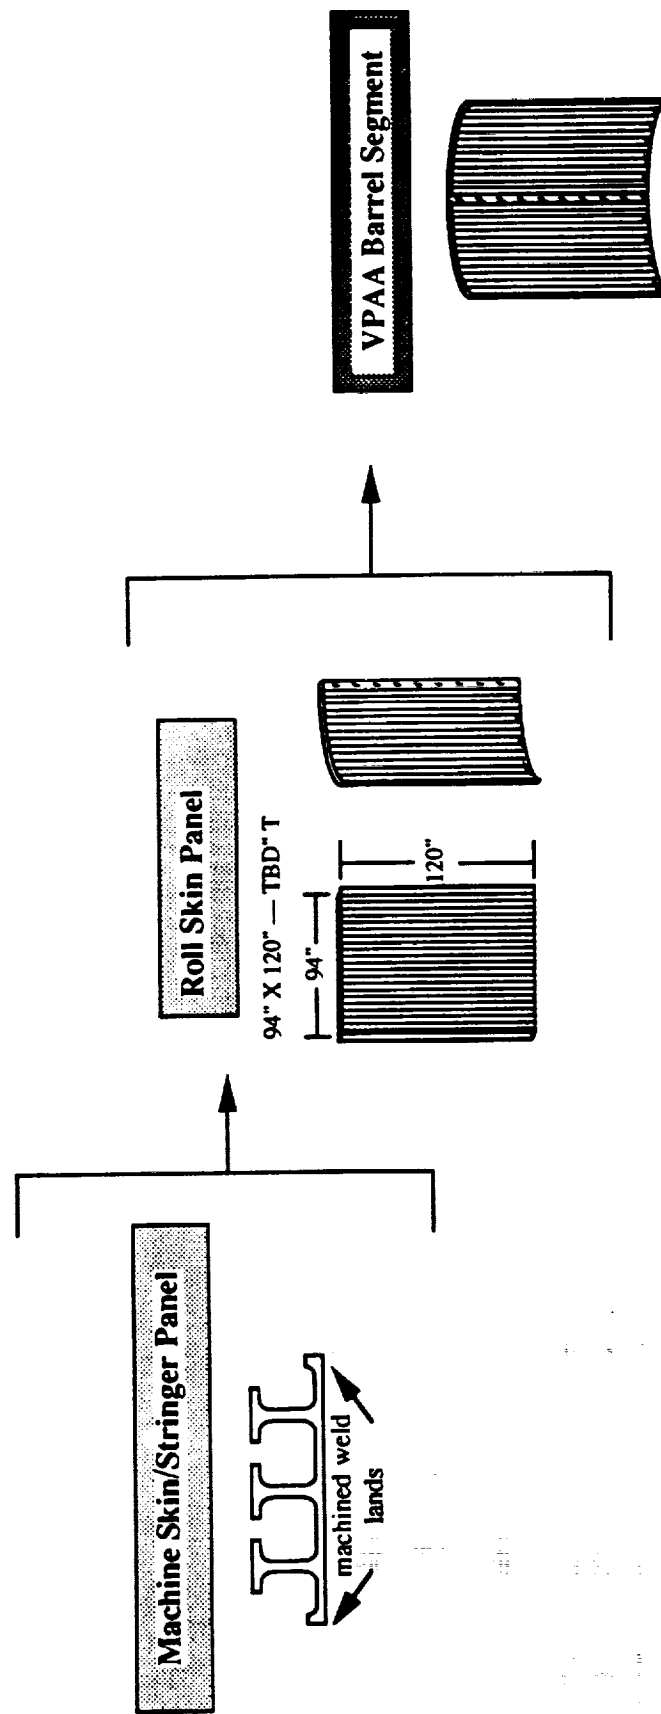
Manufacturing Process Flow for Integrally Machined 2219 Al Panels and Assembly Into Barrel Sections.
